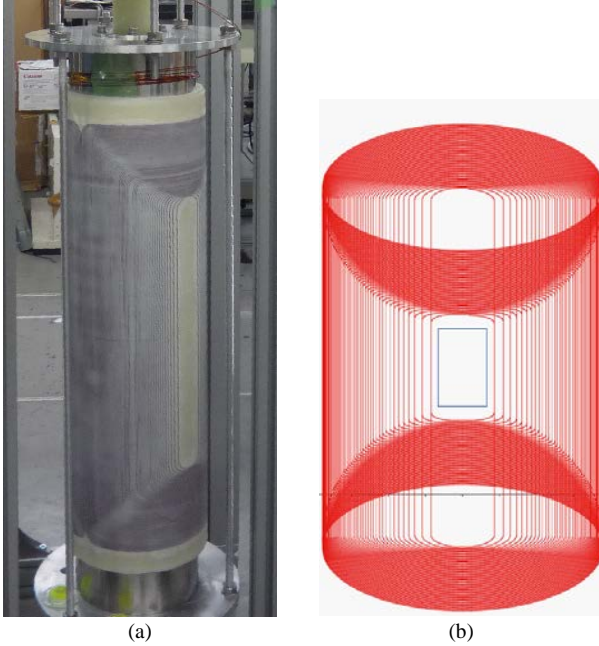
Constructed superconductor coil for measurements: (a) photograph of the coil, when it was wound to its 16 layers (b) designed position of wire in a layer of coil.
